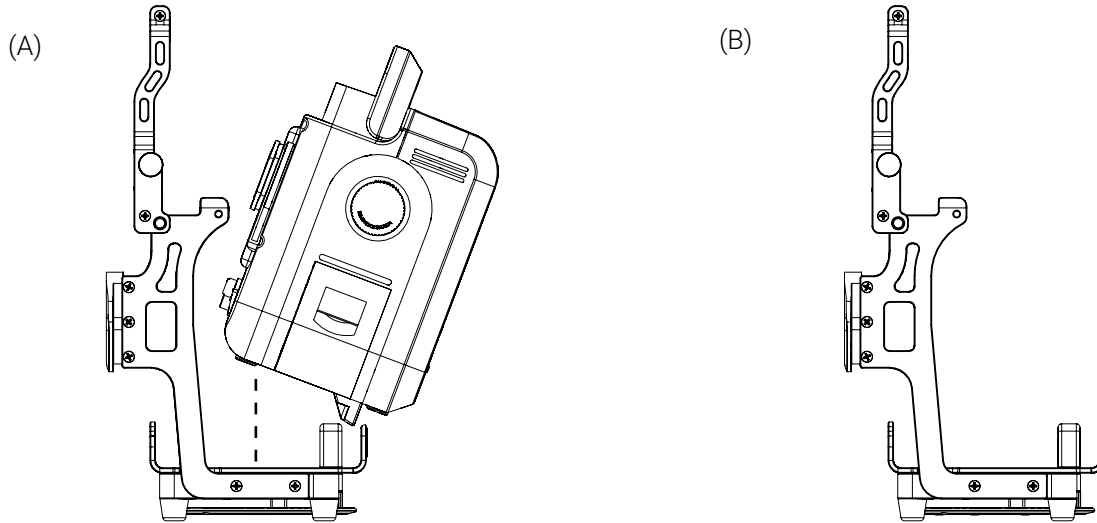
VOCSN ventilator removed from Bracket Pro Serie 280
